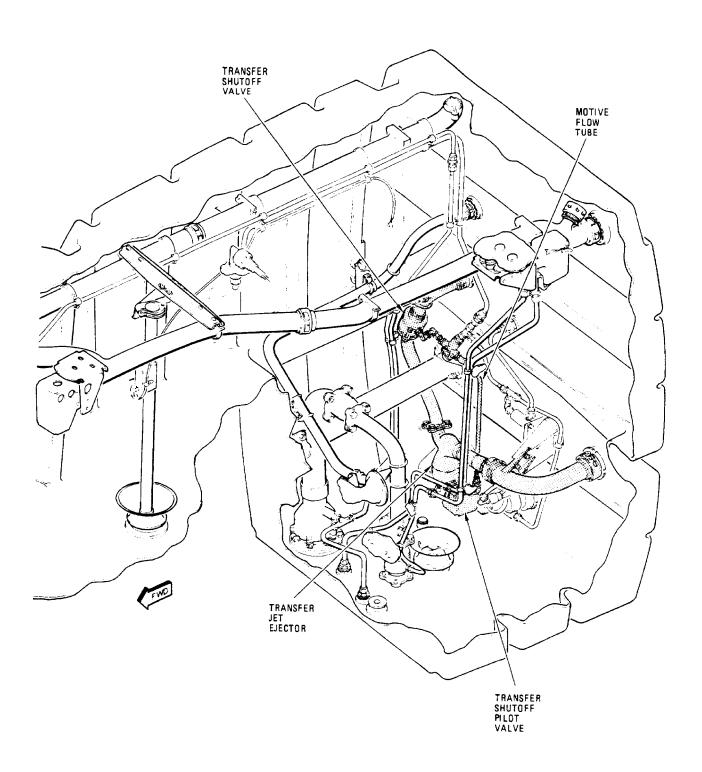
No. 1 Fuel Tank Transfer Test Troubleshooting Component Locator
